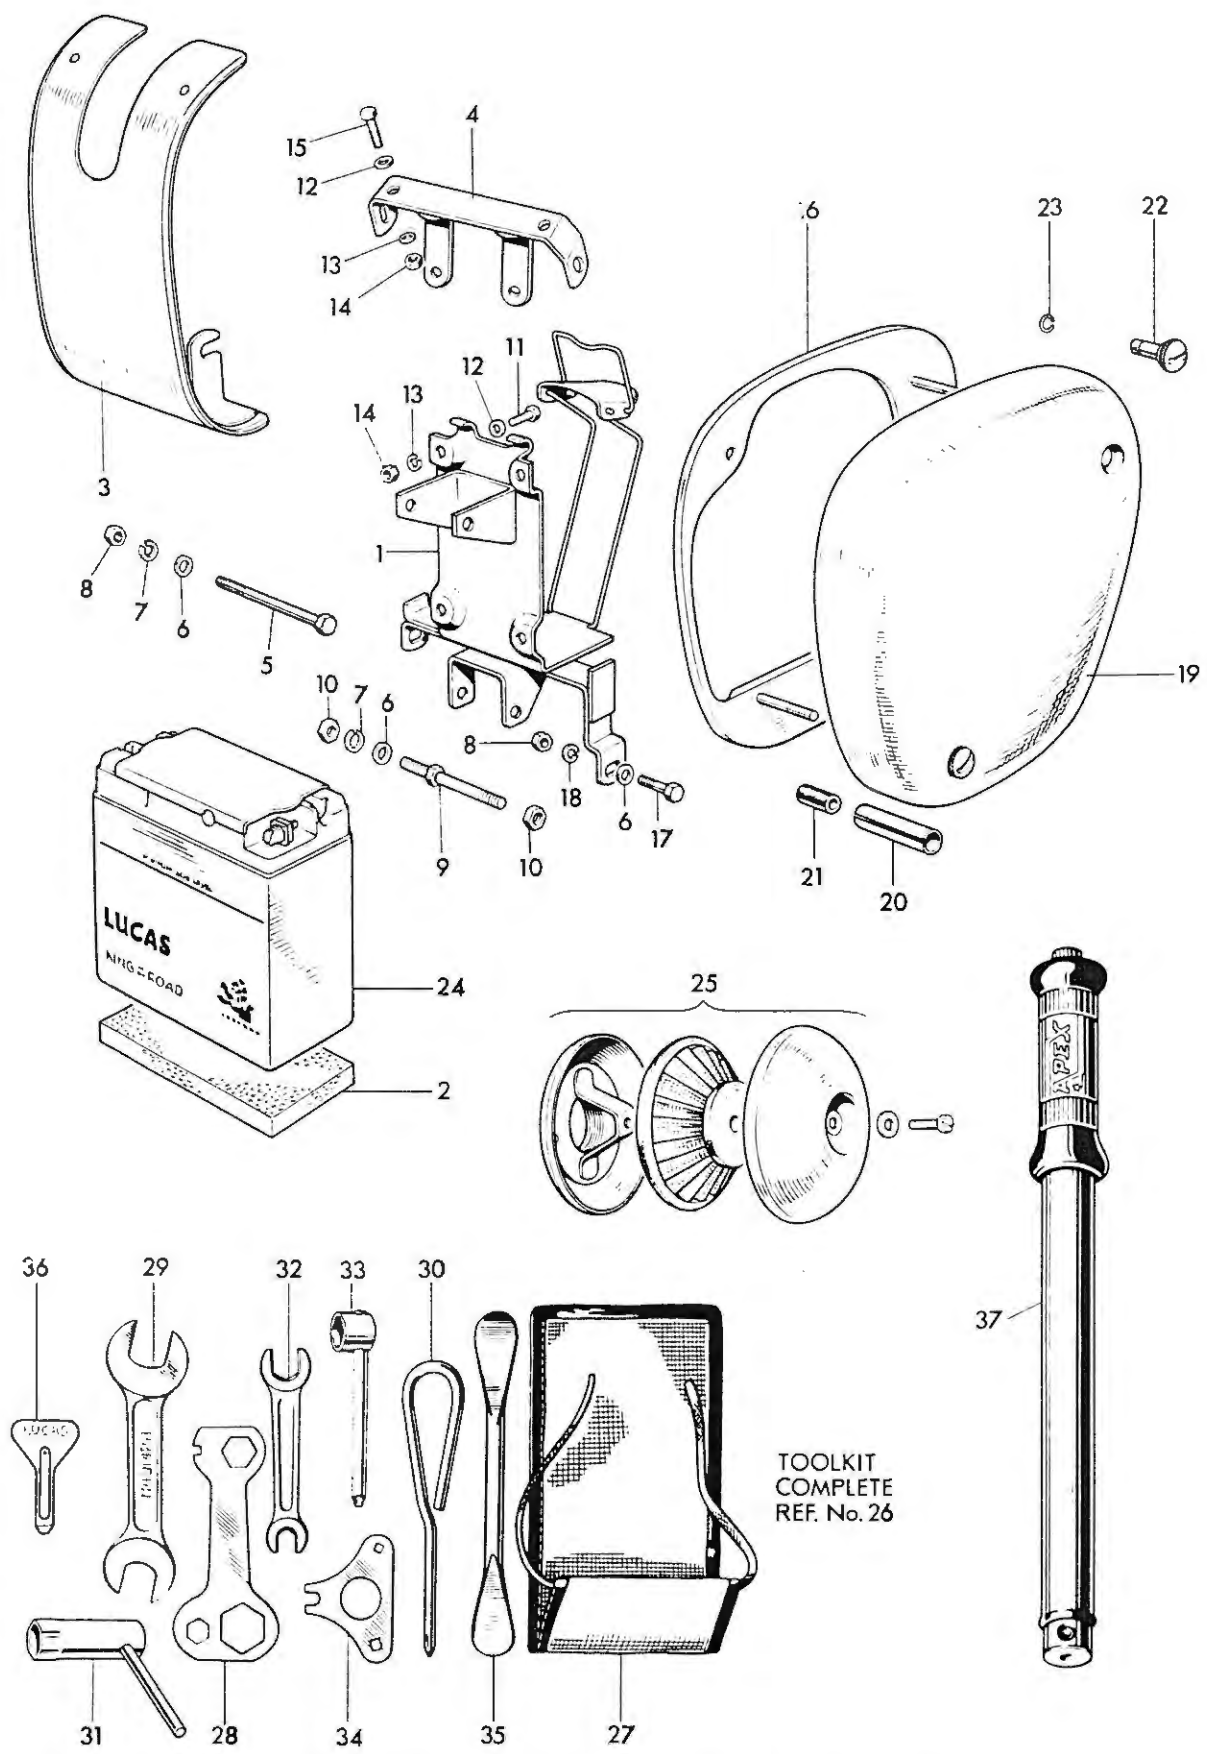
BATTERY CARRIER, TOOLBOX AND AIR FILTER
